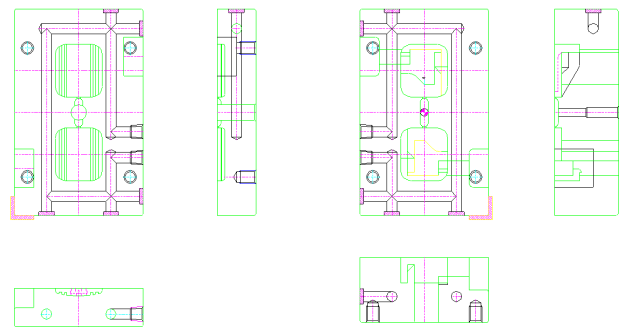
Drawing of injection mold applying the conventional cooling channels
